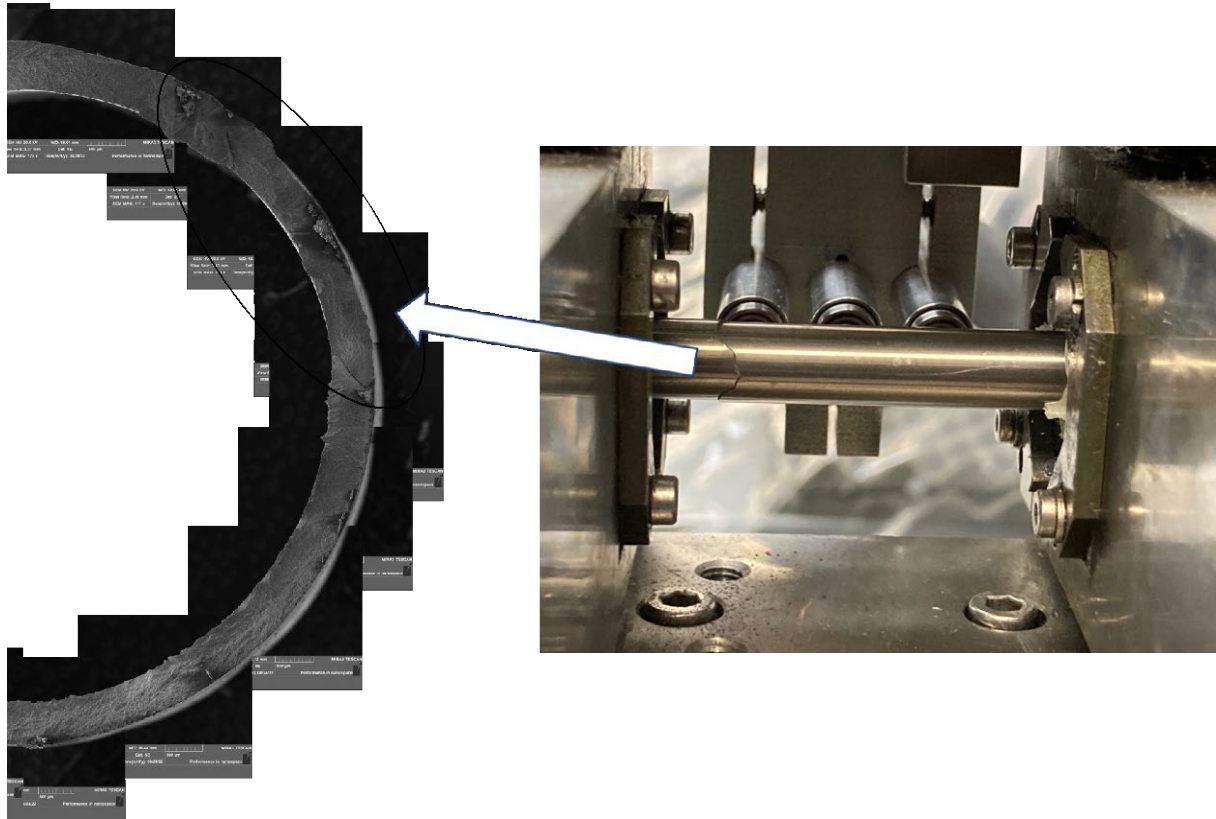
The top (fracture) view and side view of the fatigue failure region in Q2 and Q3 of sample Zirc-4-W-3.
